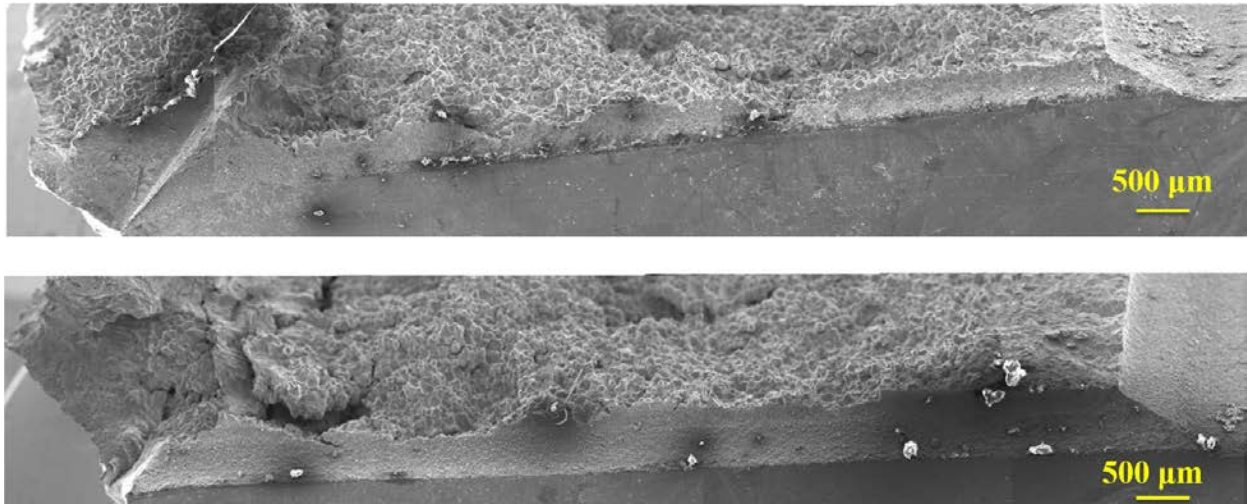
Side view images of fracture surfaces of RCT-3.
